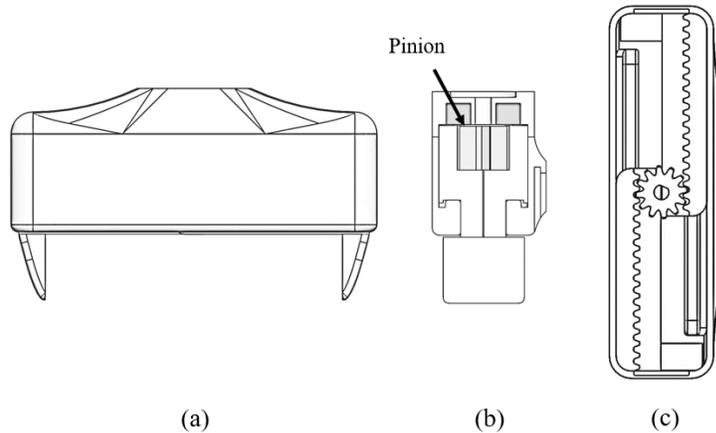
Design of a rack and pinion gripper: (a) front view; (b) cross section; (c) top view.
